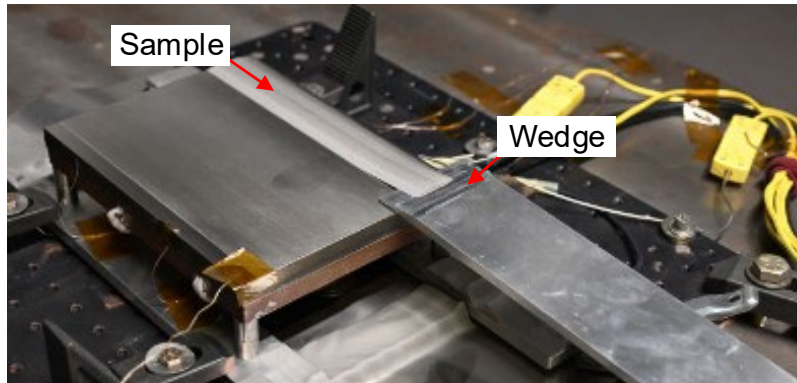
A smaller strip deposit being removed from the large 440C substrate using an aluminum wedge tool.
